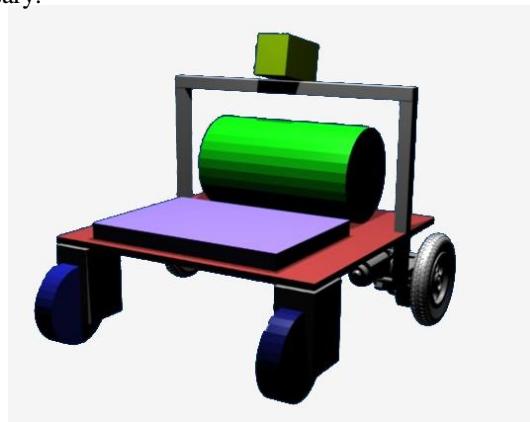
3D Model of the robot showing main parts. In real implementation, we have mounted only one caster wheel as it proved to be sufficient, and allowed more accurate control.
